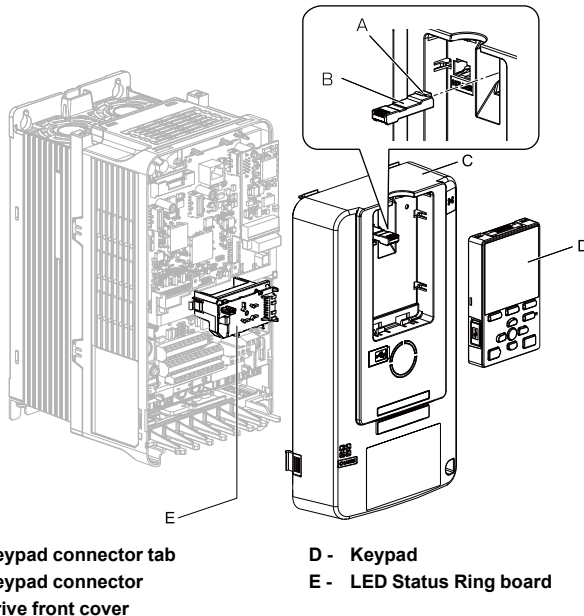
Install the LED Status Ring board, Front Cover, and Keypad
